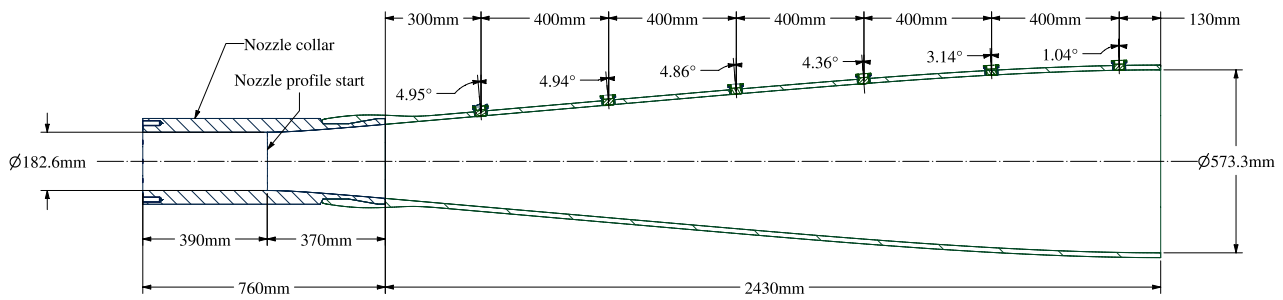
Nozzle and steel nozzle collar schematics and main dimensions.
